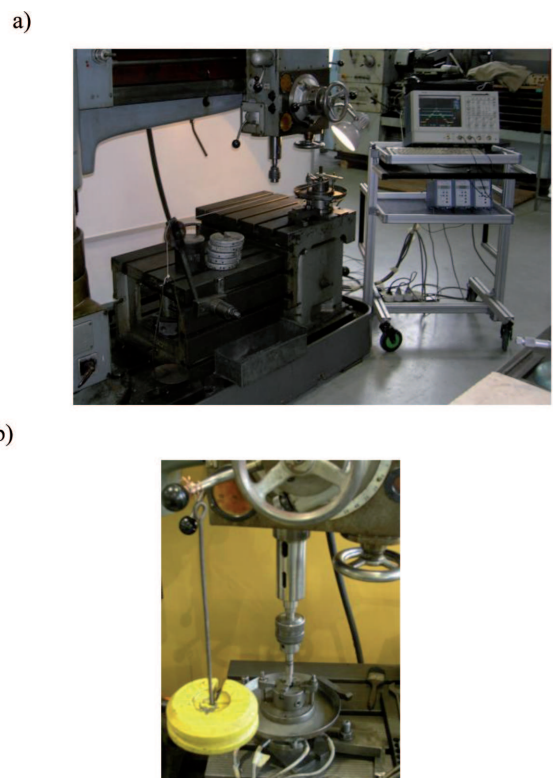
View of test stand with fixed specimens: general view (a), friction welding stand (b)
